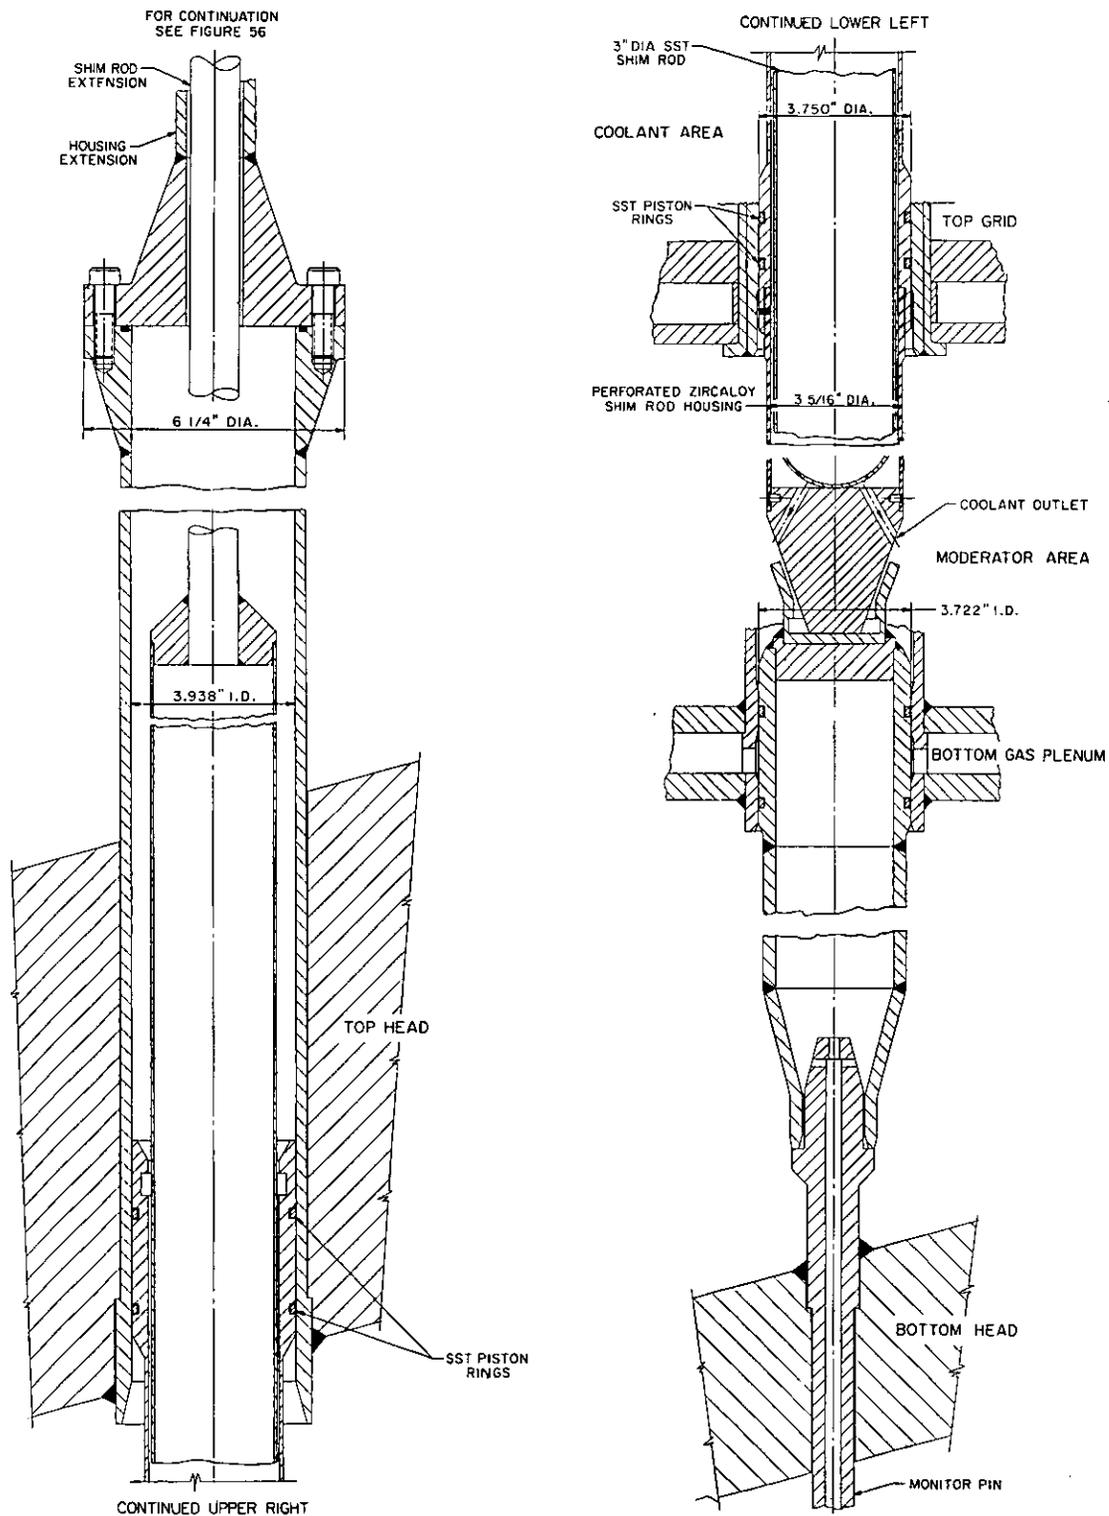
PRESSURE VESSEL REACTOR - SHIM ROD - TOP DRIVE
